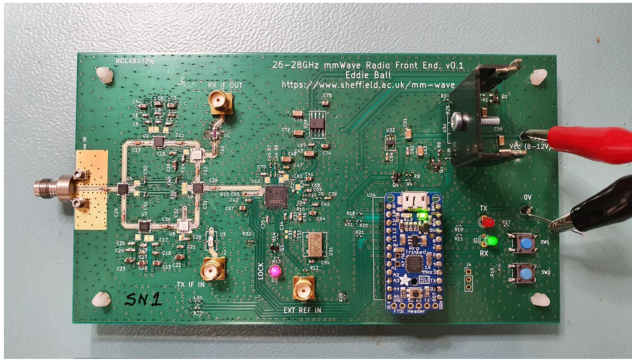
Fully assembled 28-GHz RF frontend PCB.
